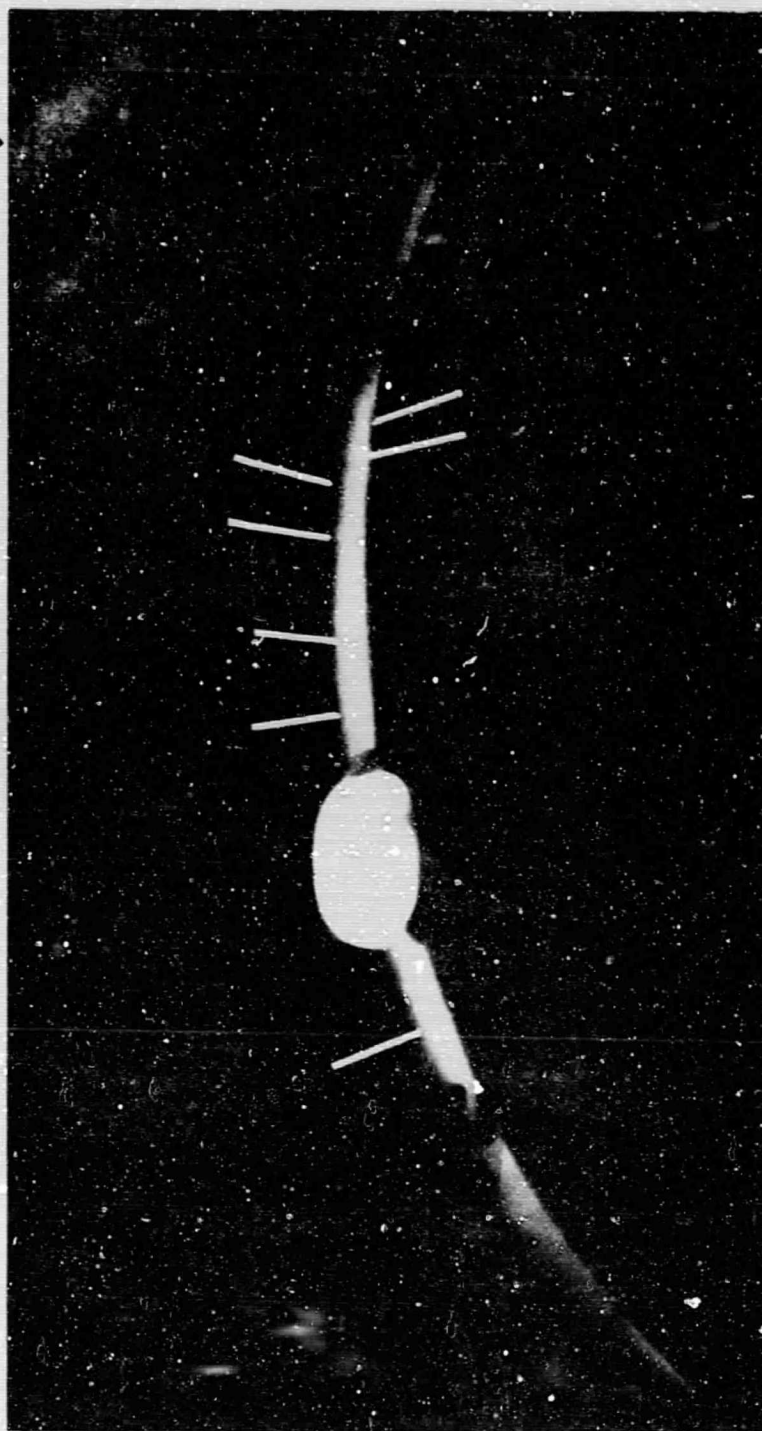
INCLUSIONS ON THE BOTTOM BURN-THROUGH WELD.
